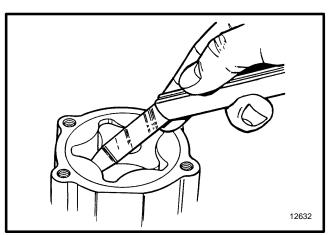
CHECK THE CLEARANCES OF THE INNER ROTOR
